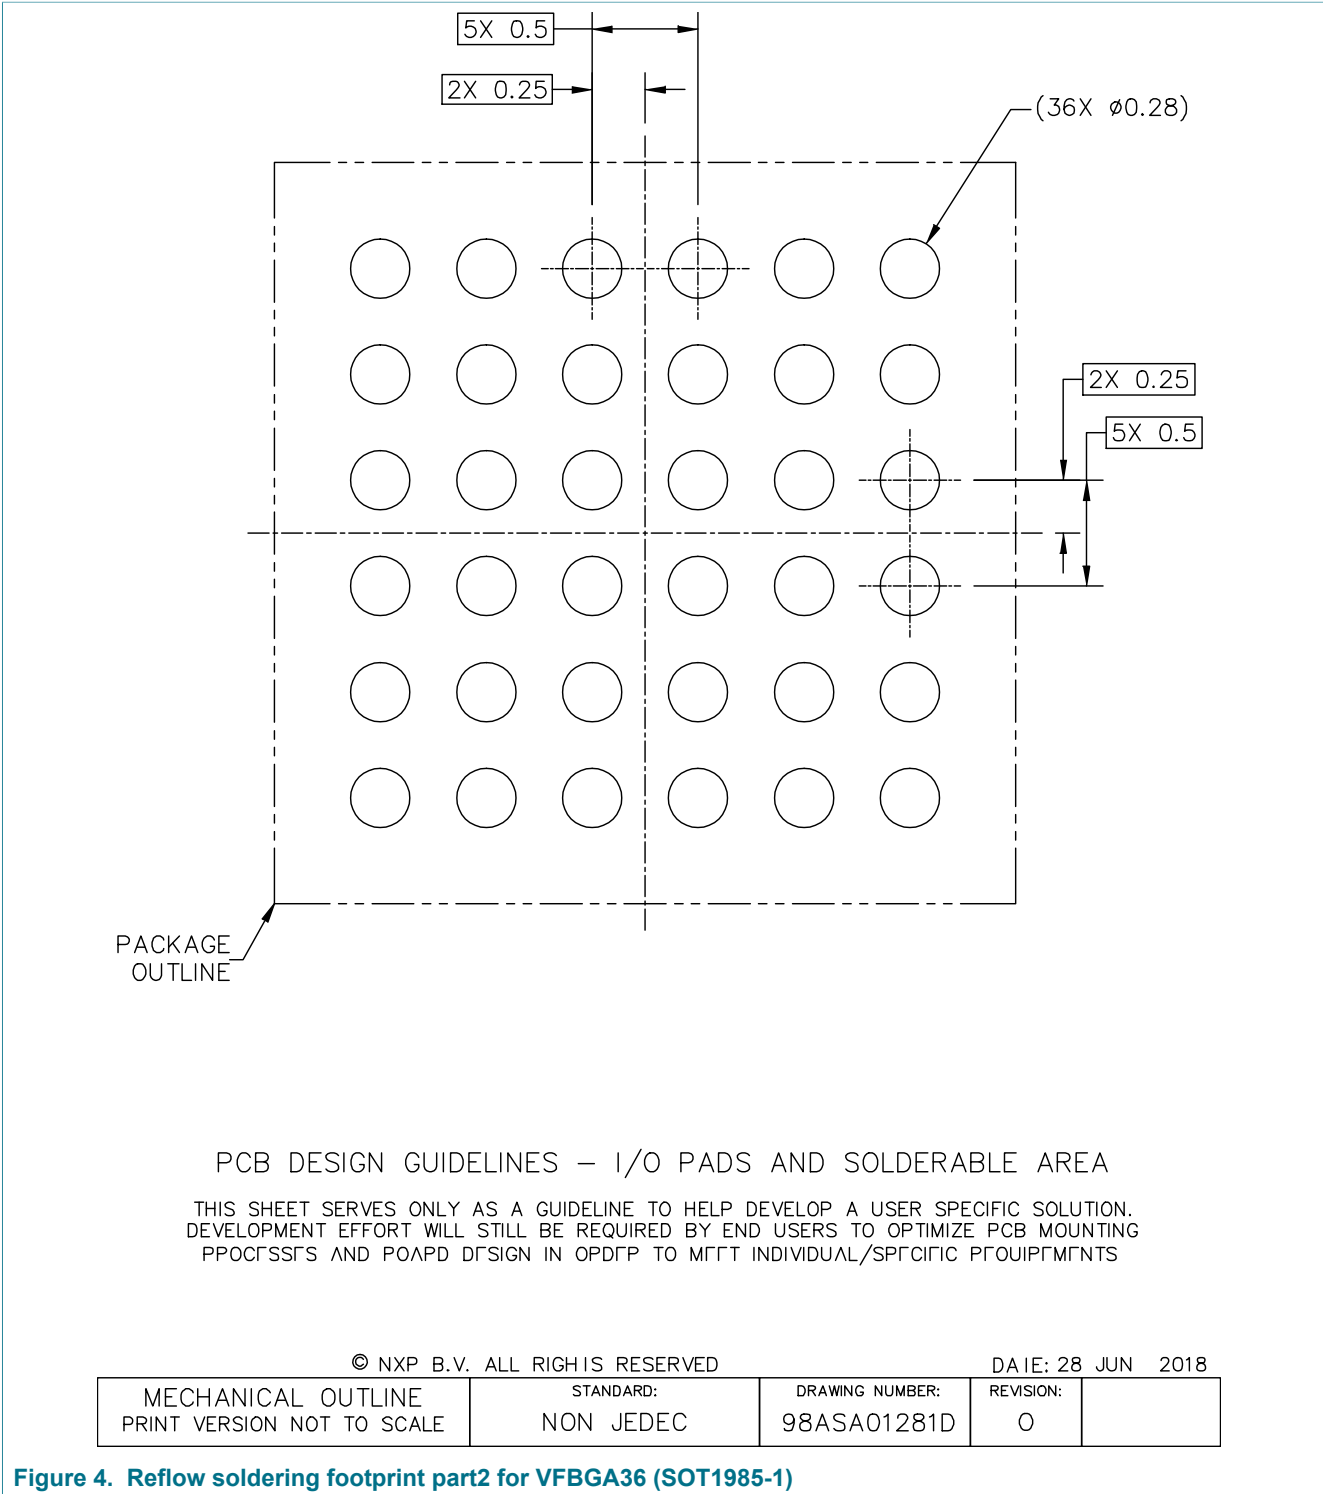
Reflow soldering footprint part2 for VFBGA36 (SOT1985-1)
